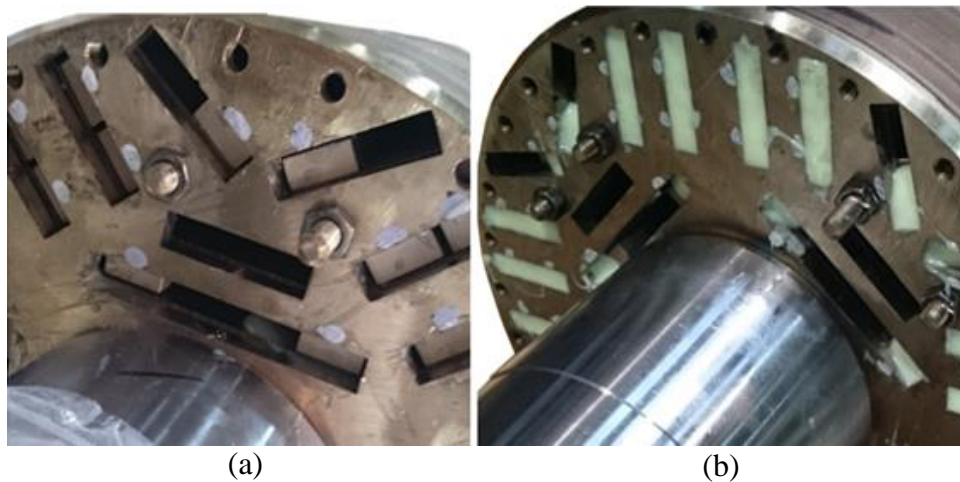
Rotor front end when all the magnets are assembled in to the rotor (a) and sealed with two component epoxy (b).
